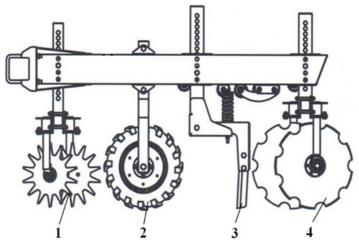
Strip-tillage equipment: 1 – row cleaners, 2 – supporting wheel, 3 – coulter, 4 – discs
